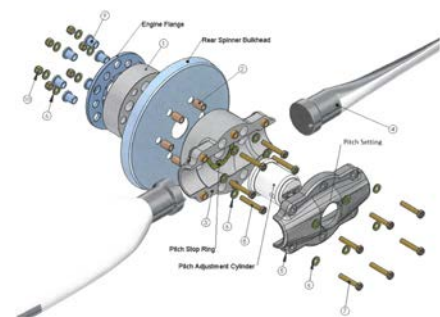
This sketch shows the general arrangement of parts that make up the Sensenich ground adjustable propeller assembly as fitted to a Rotax engine; but note, actual installation instructions differ between engine and airframe types.
